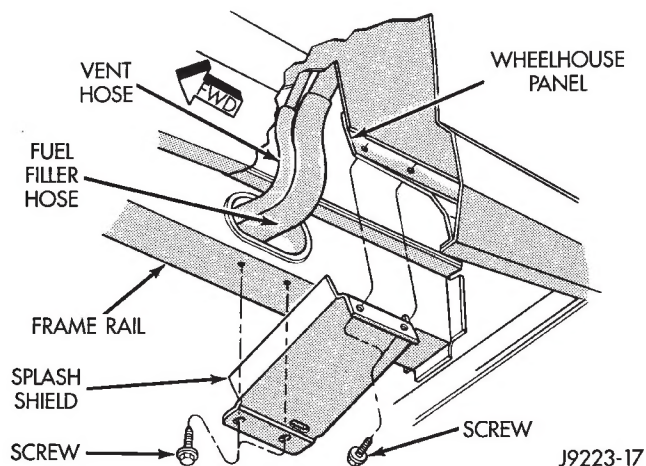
Fuel Filler Hose Splash Shield—XJ Vehicles
